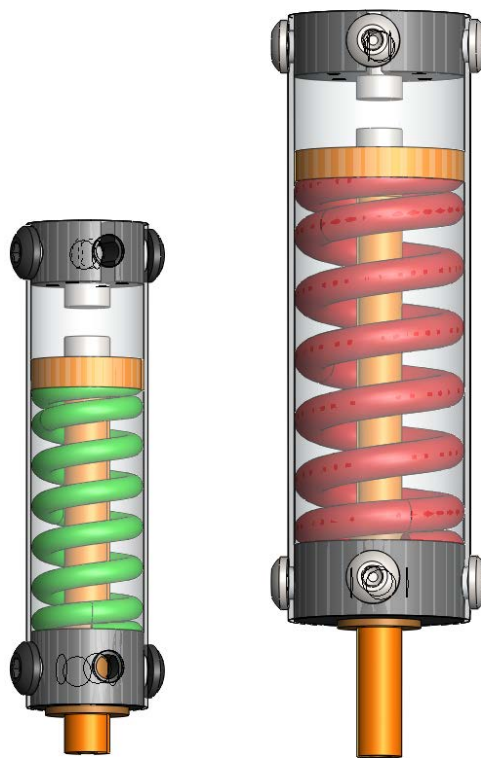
Knee and Shoulder "Spring Pod" pictured left to right
